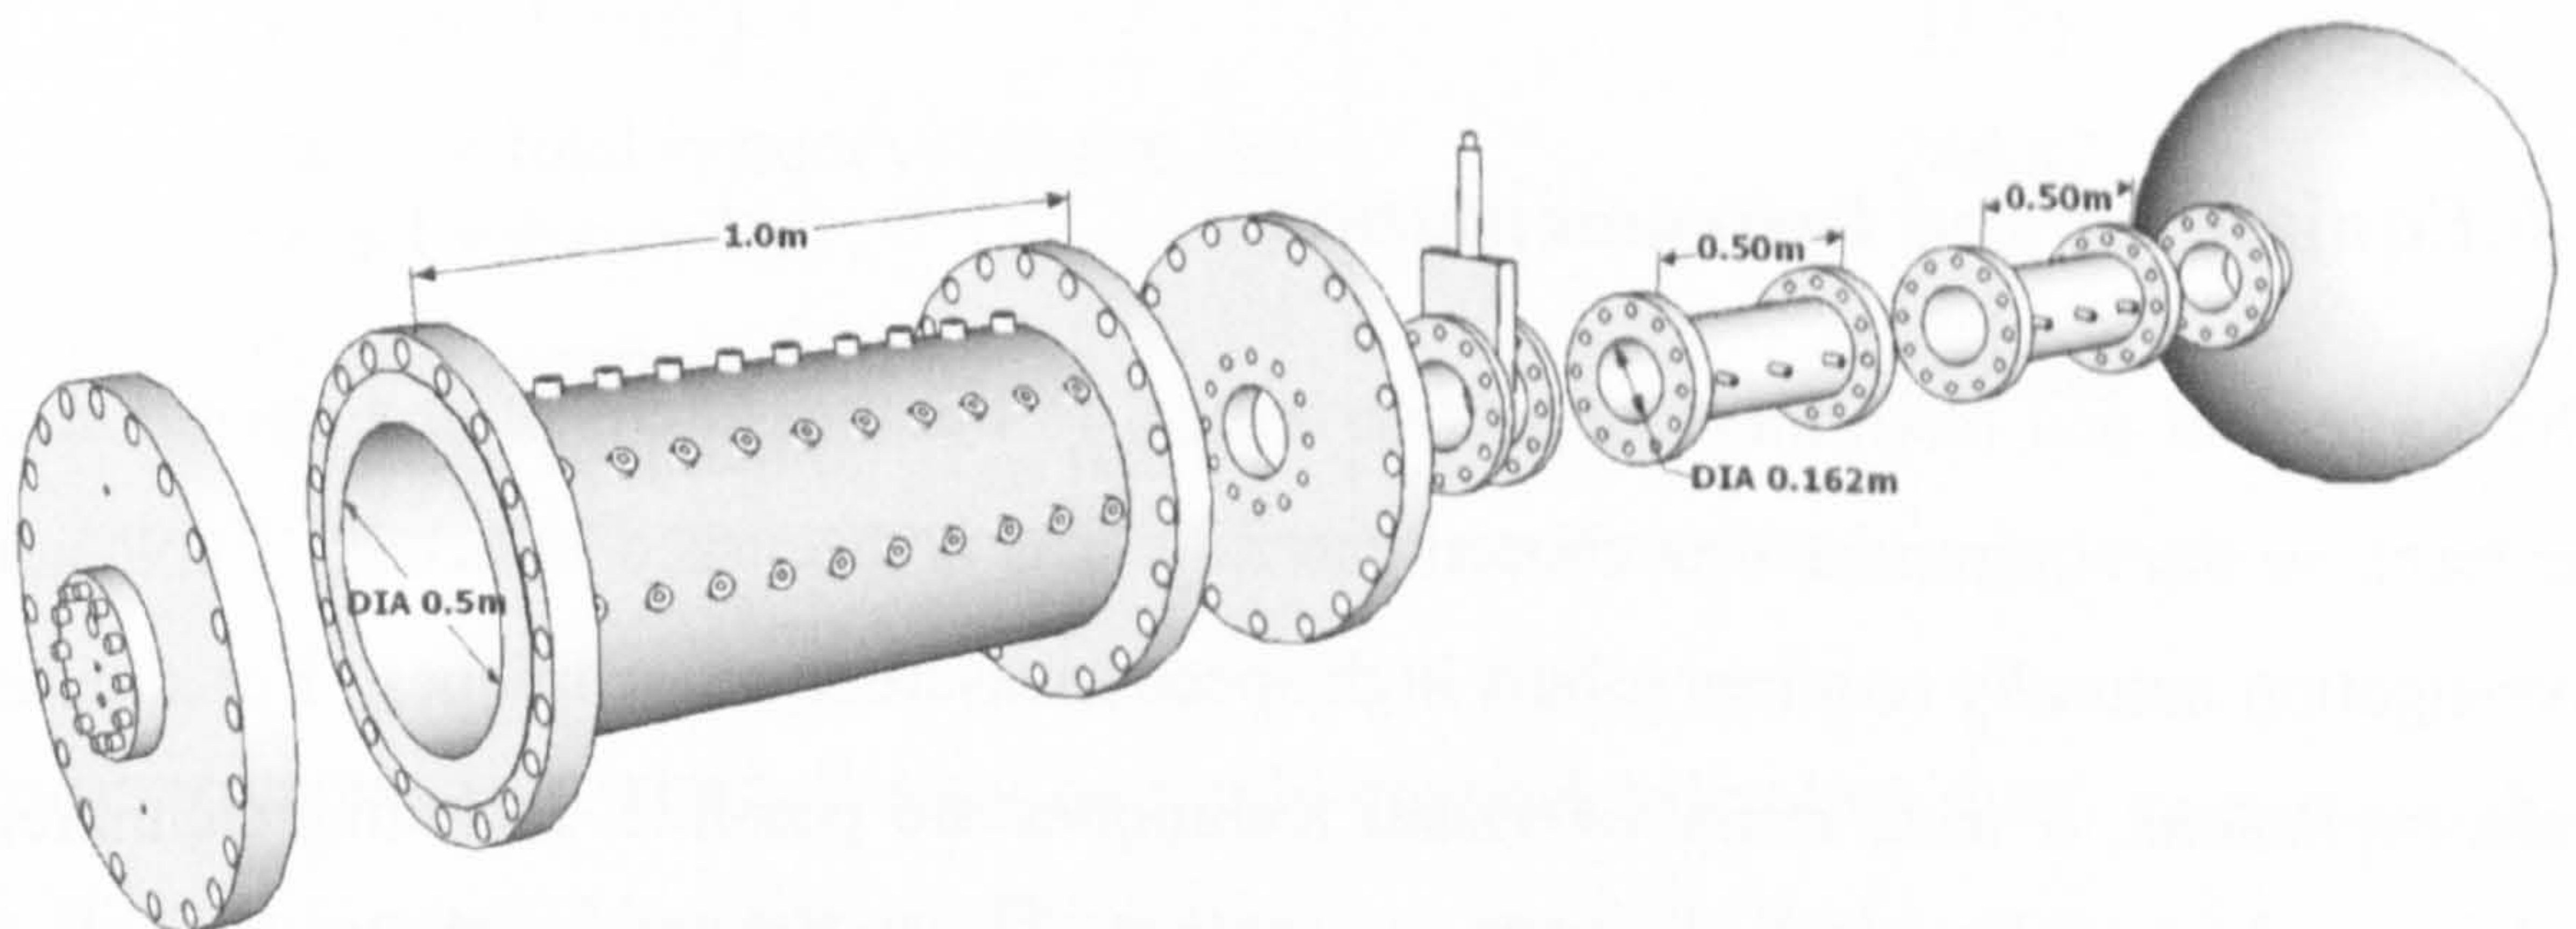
Schematic drawing of test-vessel 3: Duct vented geometry.
